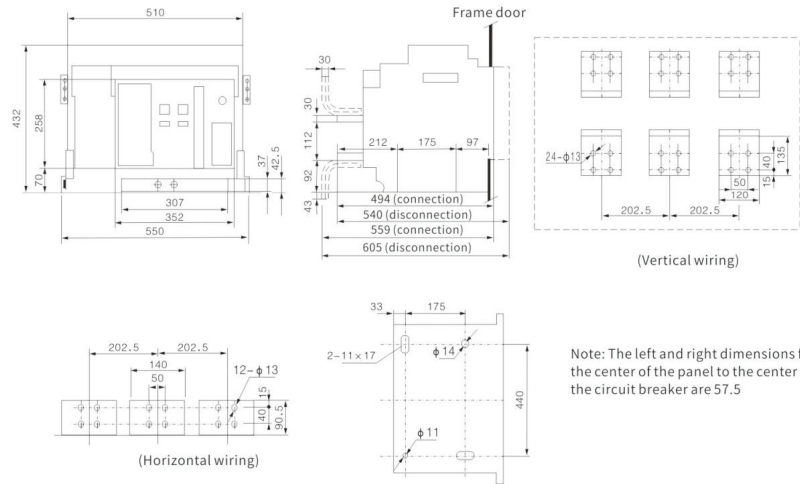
Outline and installation dimension of the draw-out type circuit breaker (W1-4000/3)
